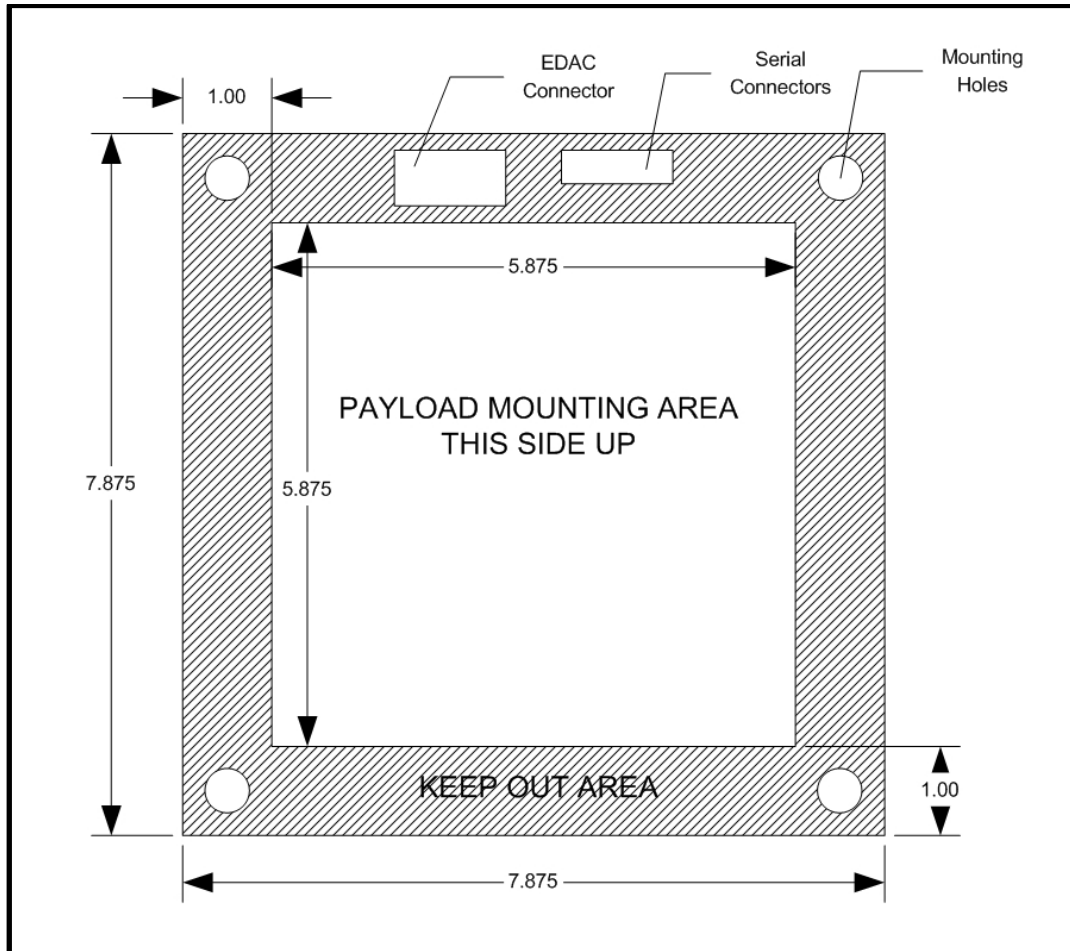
Mounting Plate for small payload (Courtesy: HASP Version 02.17.09)
